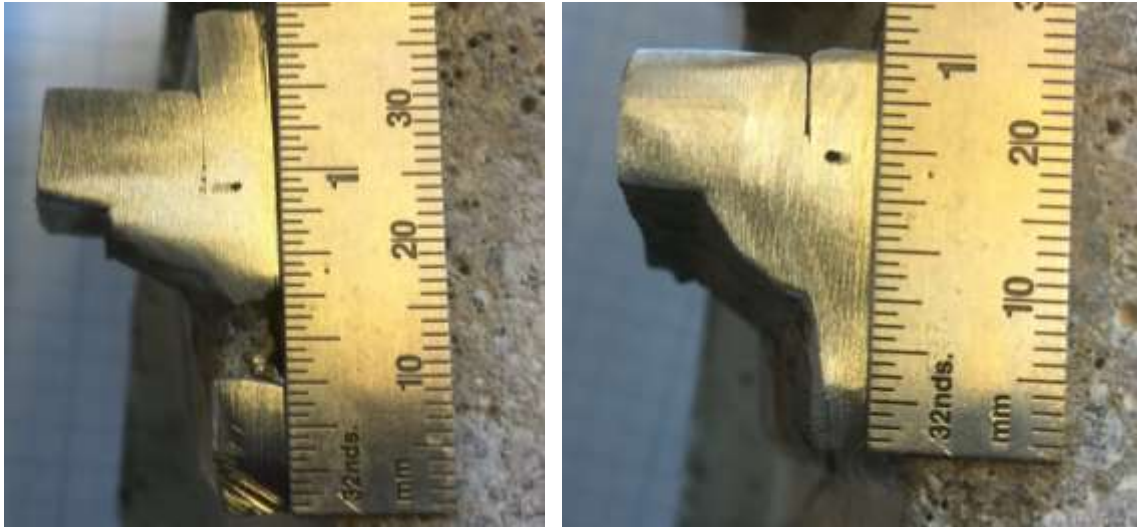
Weld penetration between jumper plate and faceplate on M1 connector (left) and M2 connector (right)
